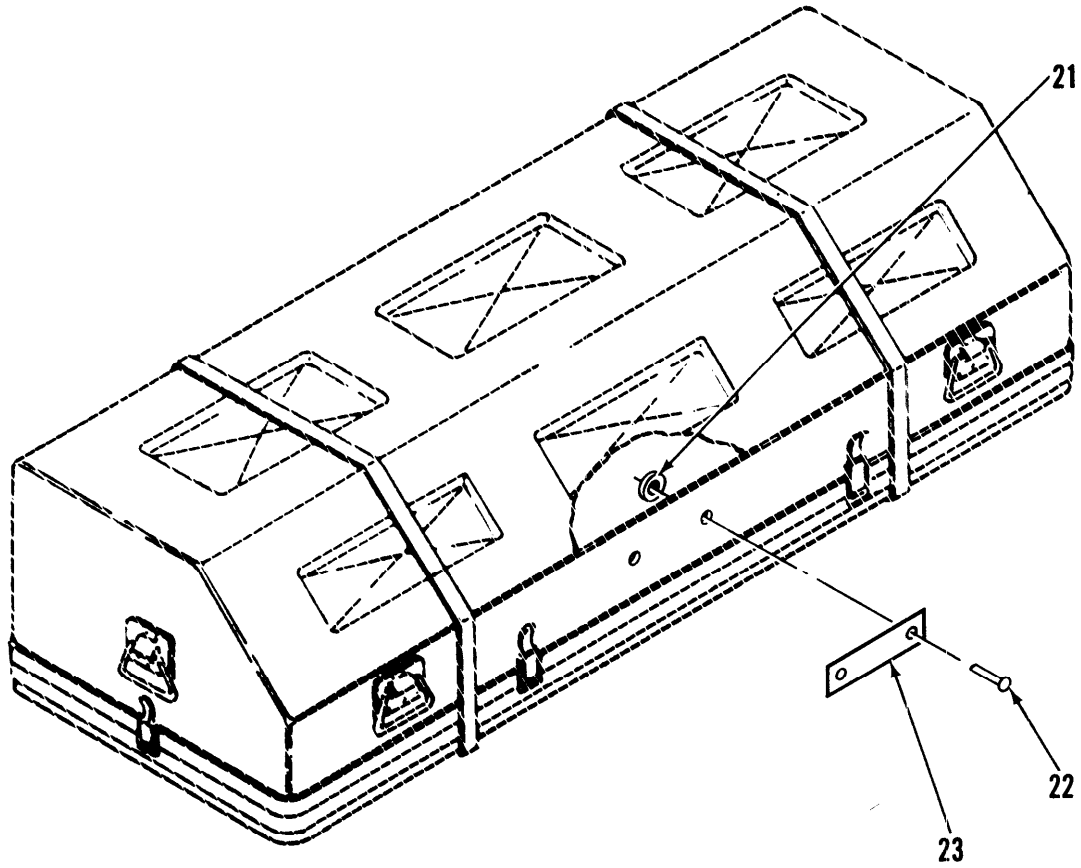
Carrying Case Assembly (Sheet 2 of 2)
